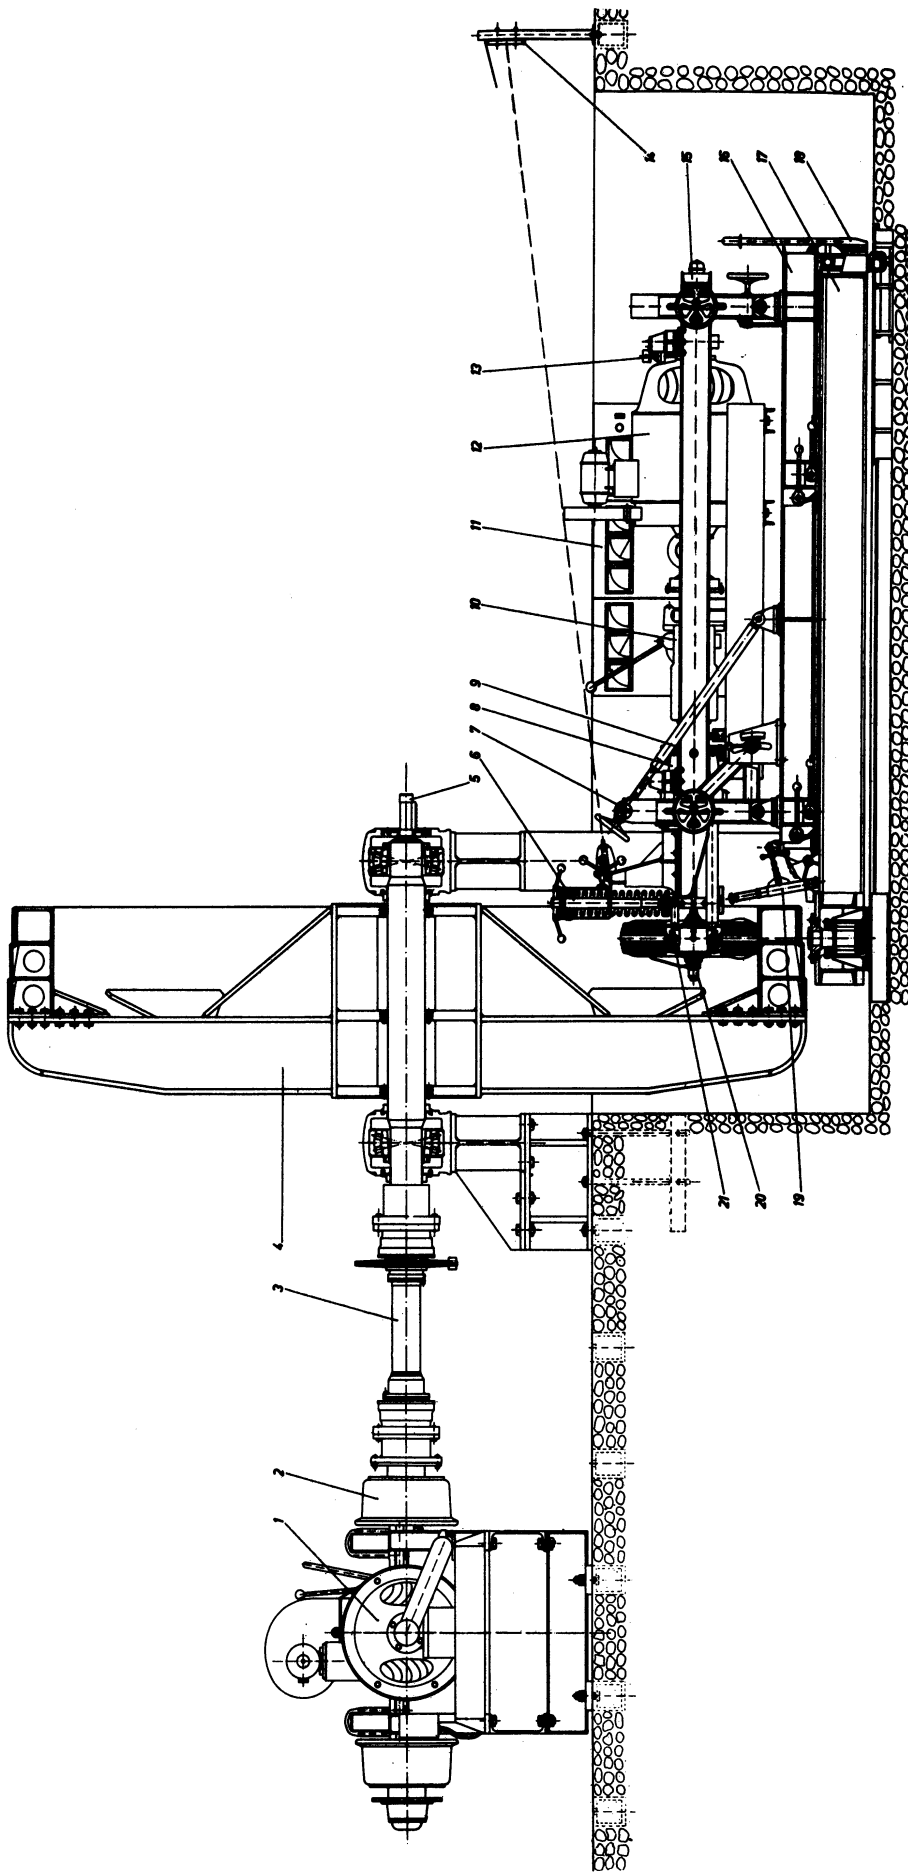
Test stand for tires at the Technische Hochschule Karlsruhe. The shaft of the drum is anchored in two swinging roller bearings and connected with the hub by means of three compression rings. The third bulkhead in the middle allows one to use a relatively slender shaft (200 mm in dia) whose deflection is only 0.05 mm under a drum load of 7.5 t maximum. The welded drum is bolted onto 8 I-shaped spokes. Other details are given in the text. Scale 1:40, total length about 9.5 m.
